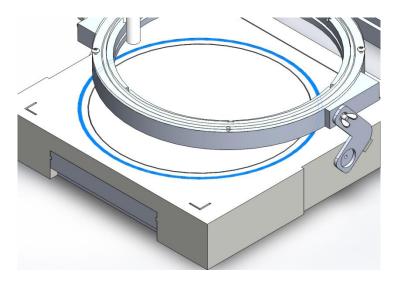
Rubber Ring Is Plugged into Cutting Base
